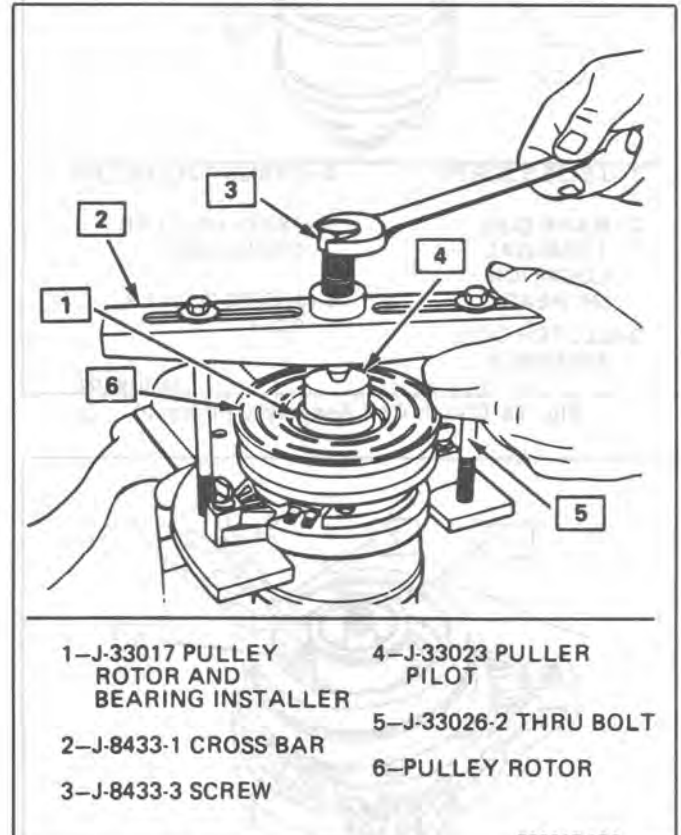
Installing Pulley Rotor and Bearing Assembly
